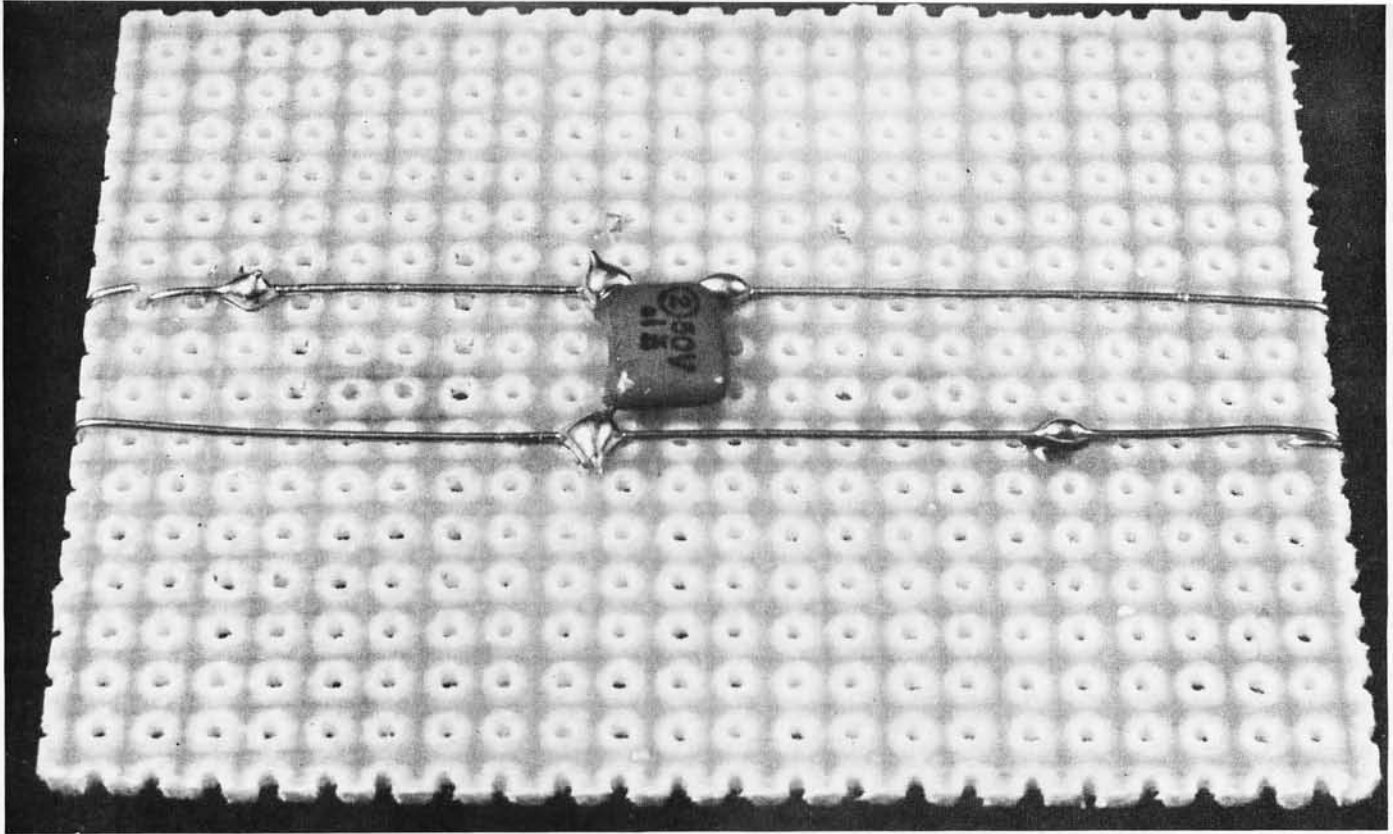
The reverse side of the assembly in photo 1 shows how two bus strips have been mounted. These strips have connections through the board to the power and ground terminals of the ICs. Also shown in this sample assembly is the bypass capacitor which is part of normal power distribution practices for logic families.
